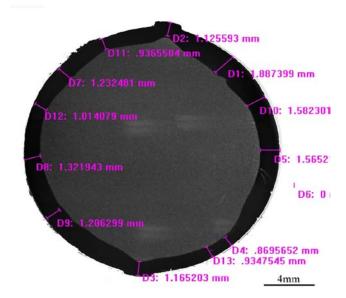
Sectional surface image of the stainless steel clad steel assembled by hot rolling
